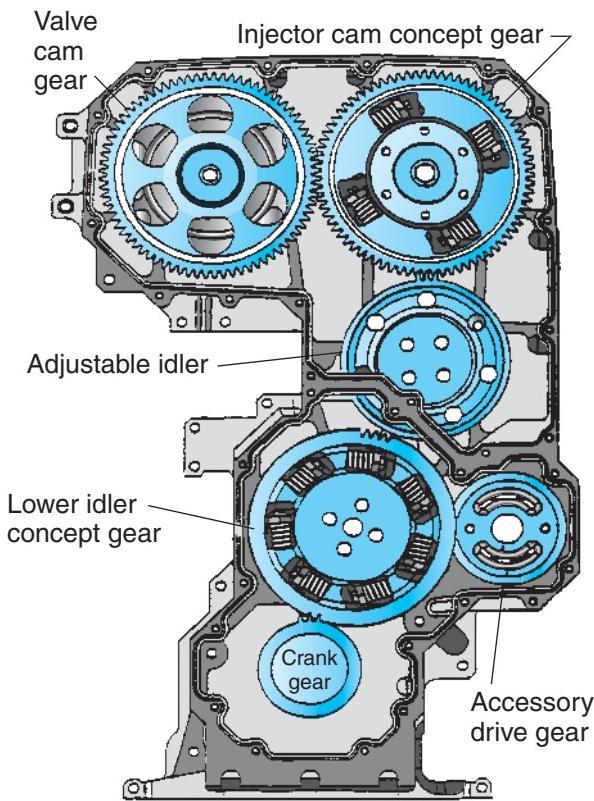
Cummins ISX timing geartrain used until 2010. (Courtesy of Cummins)
